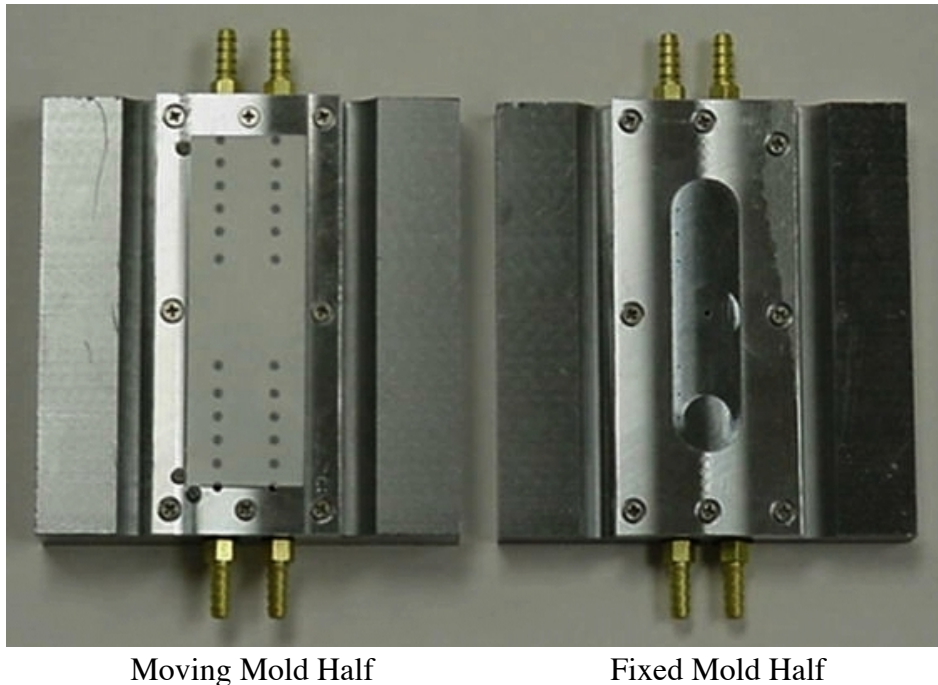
Top View of Mold Plates and Inserts for Co-molding on a Glass Substrate
